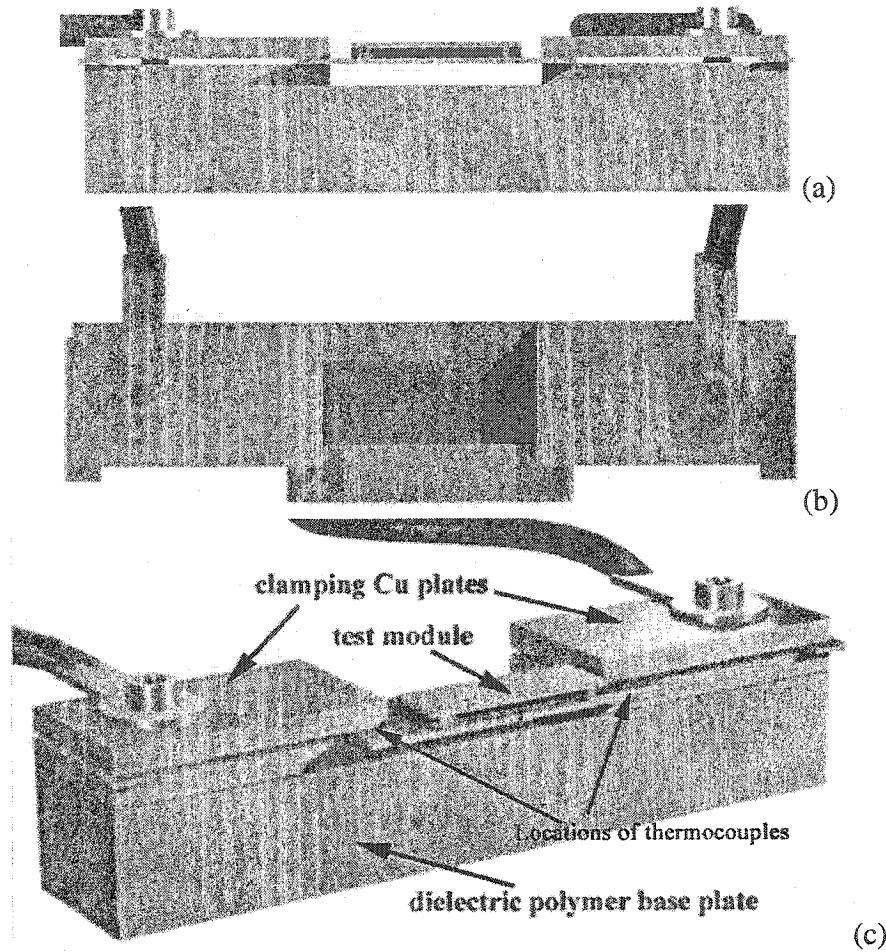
New scheme of the test vehicle fixture (a) front view (b) plane view (c) 3-D view
